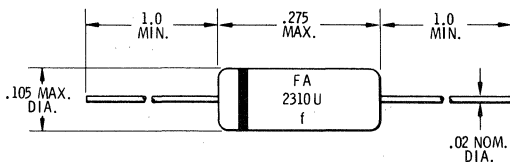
BRIDGE PACKAGE DIMENSIONS.
